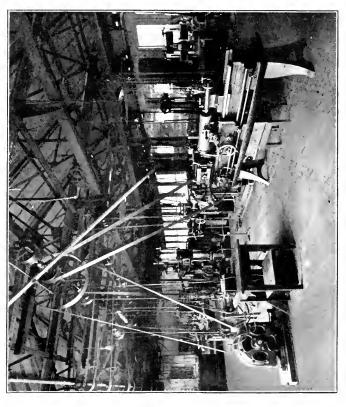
View in the University of Illinois Machine Shop showing lo-CATION OF LATHE AND MOTOR DRIVE USED IN TESTS WITH HIGH-SPEED TOOL STEELS
